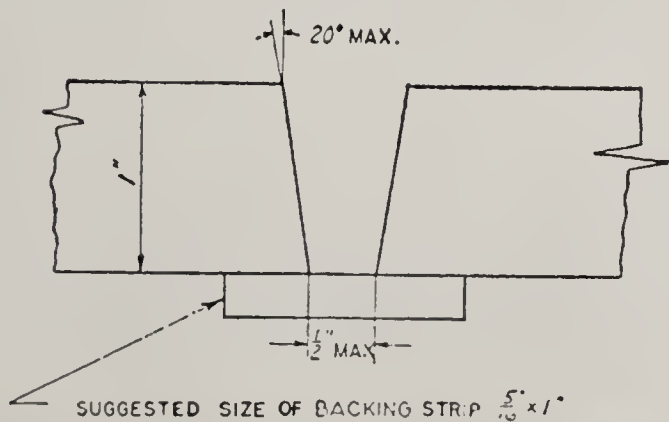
(a)—Butt Joint for Plate 1 in. Thick.
